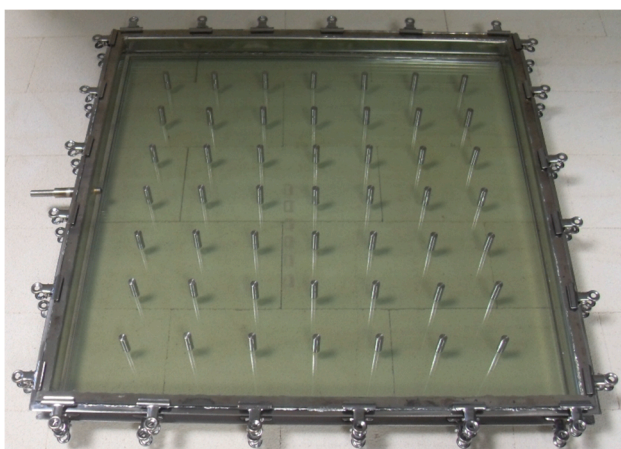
Applying uniform pressure on edge seal region using clamps.
